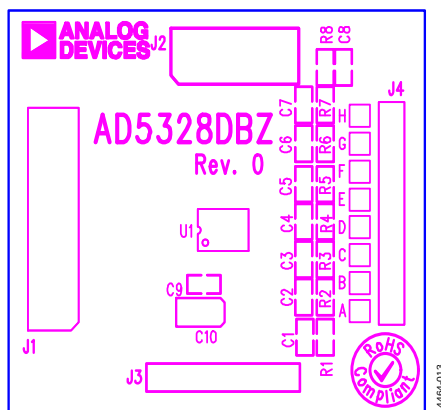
EVAL-AD5328DBZ Daughter Board Component Placement
